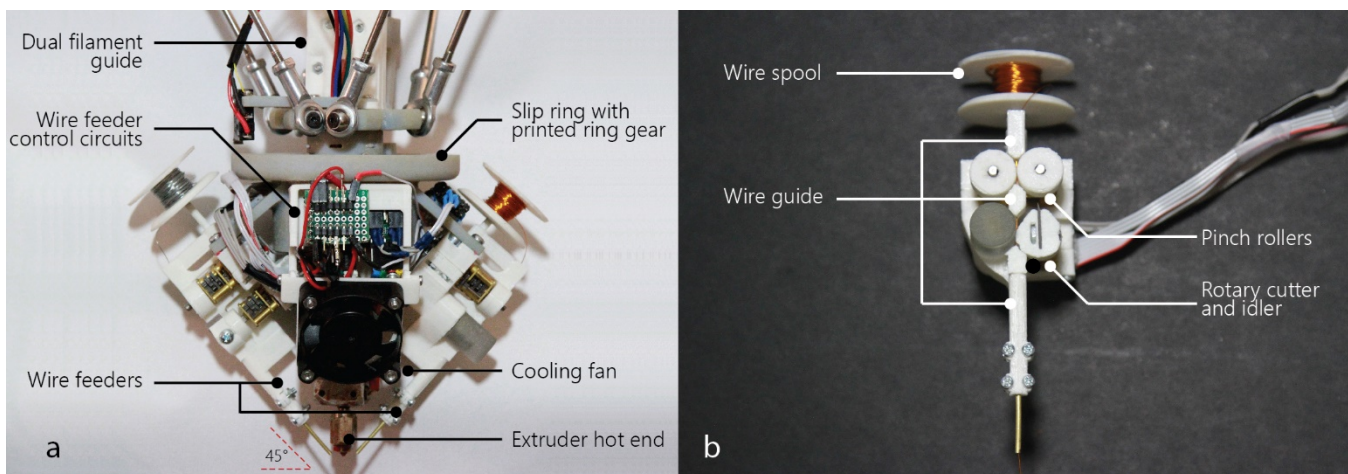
Print head design overview. a) The print head contains a pair of motor driven wire delivery mechanisms, and a rotary cutting mechanism. b) This pair of wire feeders is installed on a rotary slip ring centered around a conventional FDM extruder.
